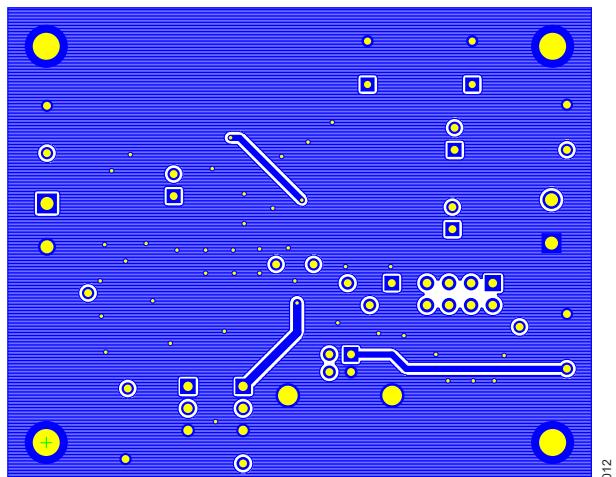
ADPL86610 EV Kit PCB Layout—Bottom Layer
